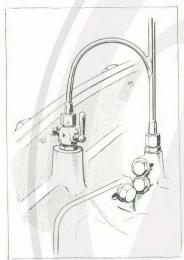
The Oil Circulation Test Cock on the 14 H.P. "Standard" Engine.
